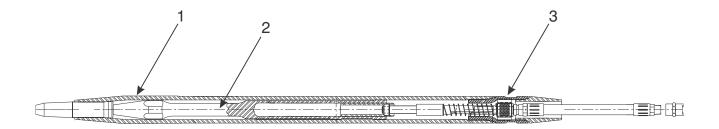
Model 310 Hole-Hog Complete Assembly
